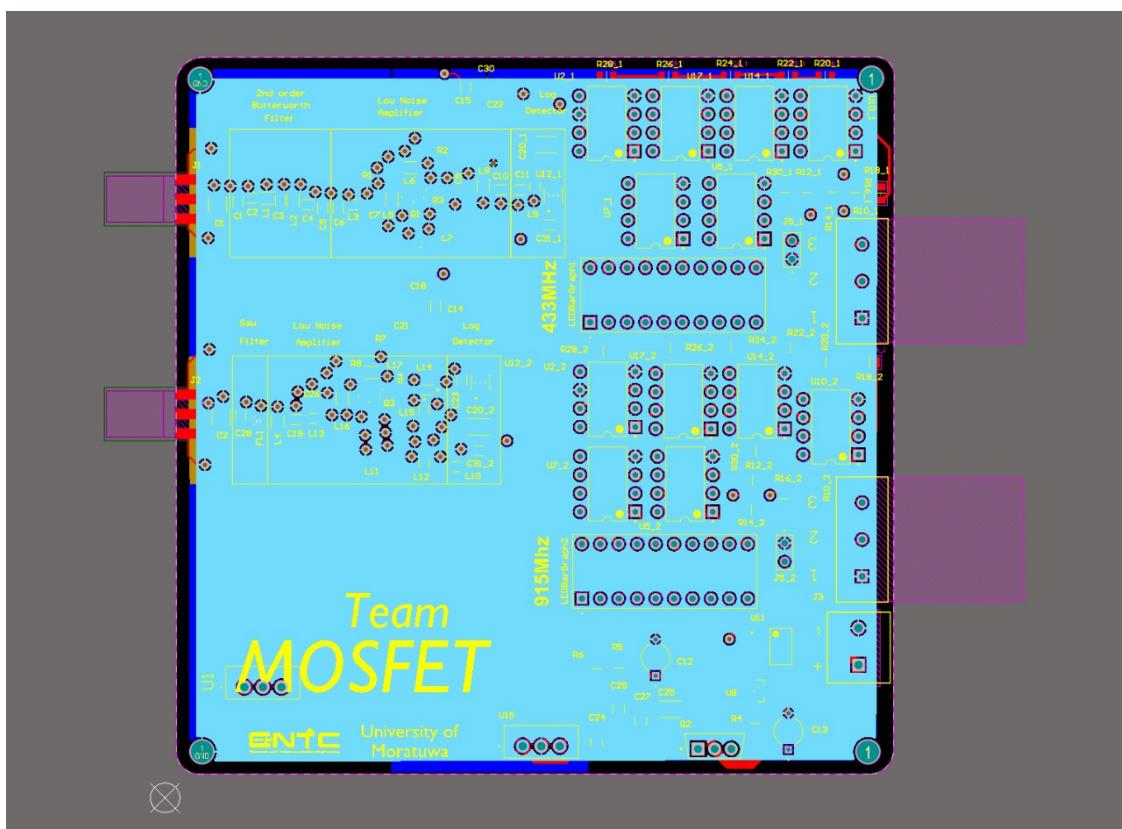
PCB Drawing - PCB GND Layer (Layer 3)
